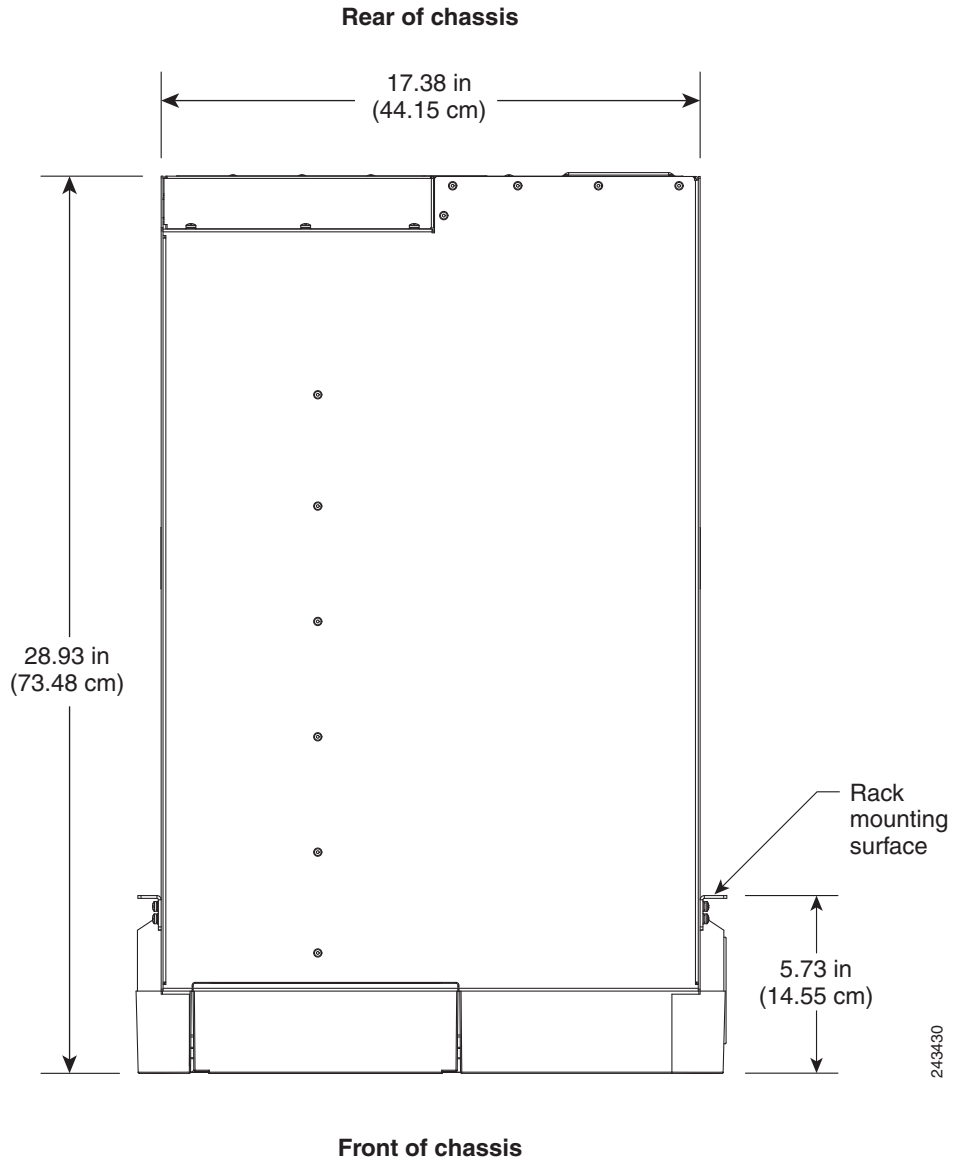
Cisco ASR 9904 Router Chassis Footprint Dimensions—Top Down View
